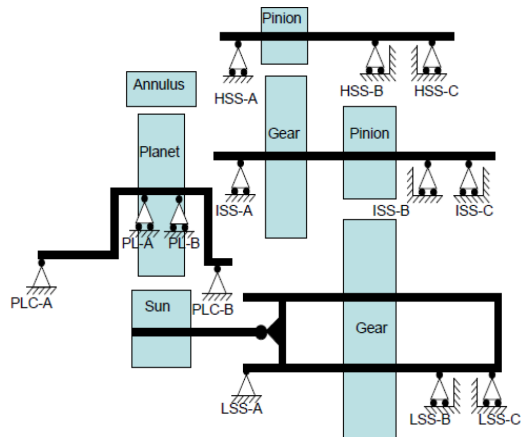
Topology of bearing in a wind turbine gearbox (courtesy NREL 2011).
